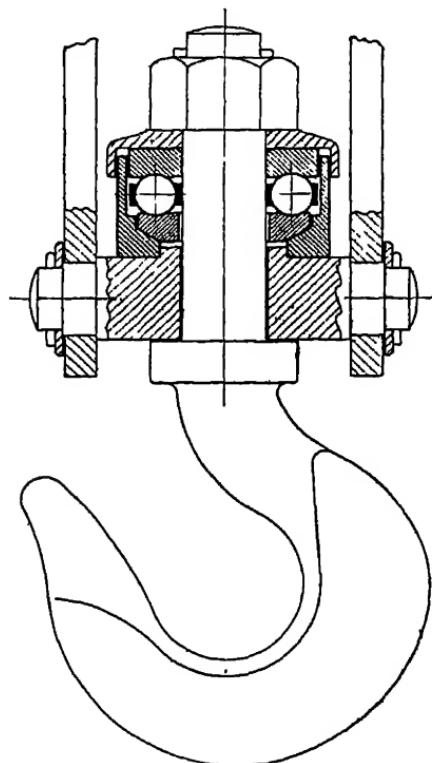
EXAMPLE OF THRUST BEARING APPLIED TO A CRANE HOOK
